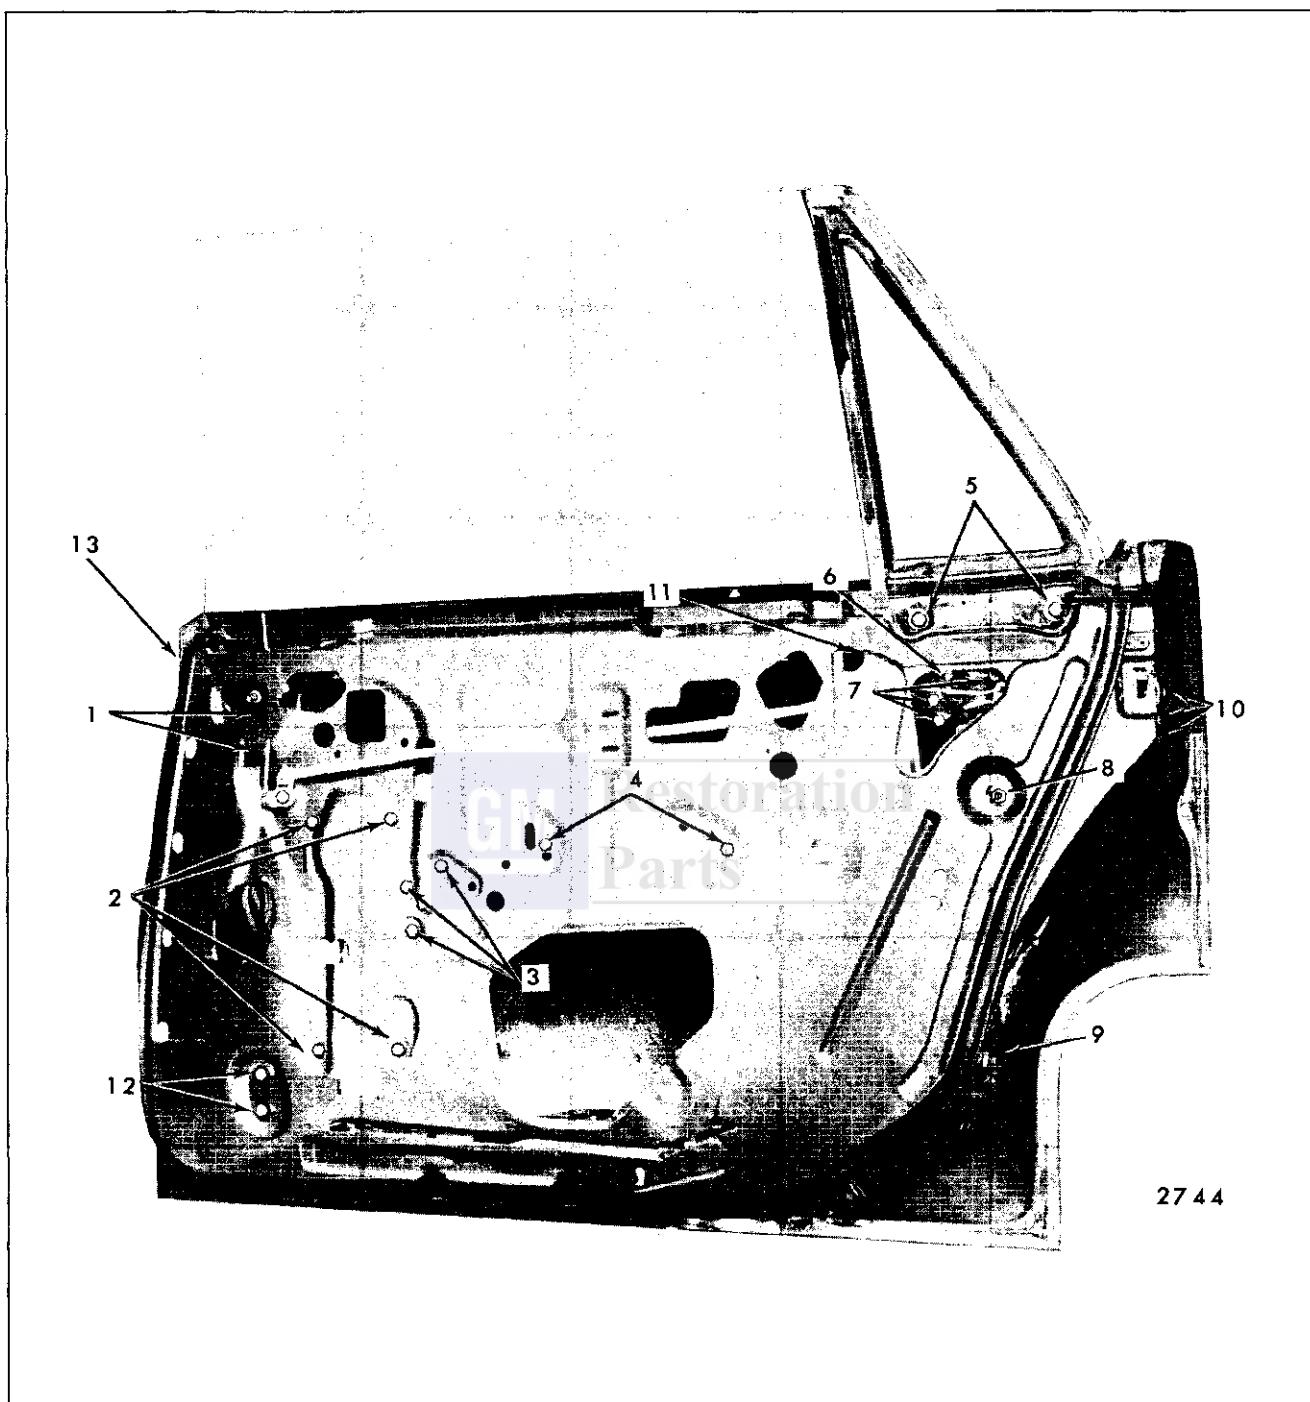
Rear Door Hardware - 68069 - 68169 Styles
